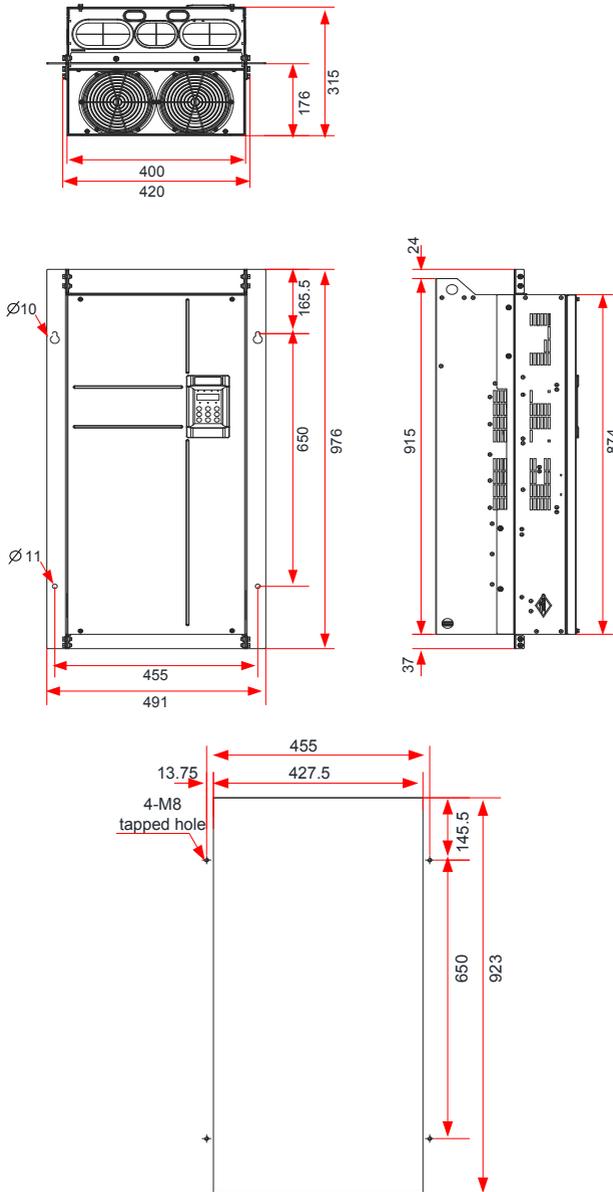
Intermediate mounting bracket dimensions and hole spacing for 132-160 kW AC drive models
